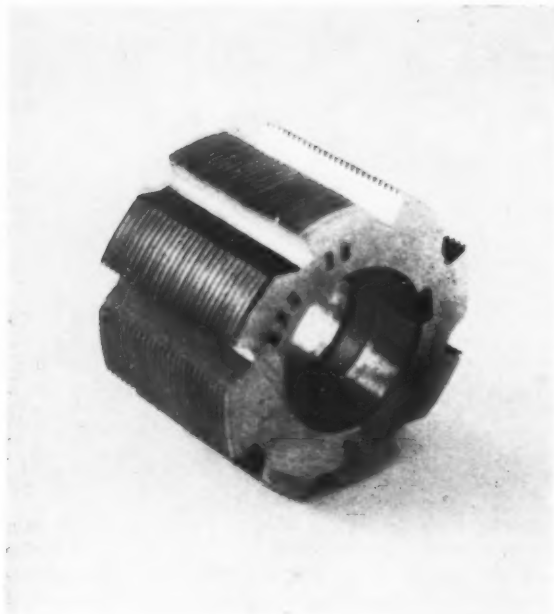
Typical hob found to be cracked after grinding the teeth.
